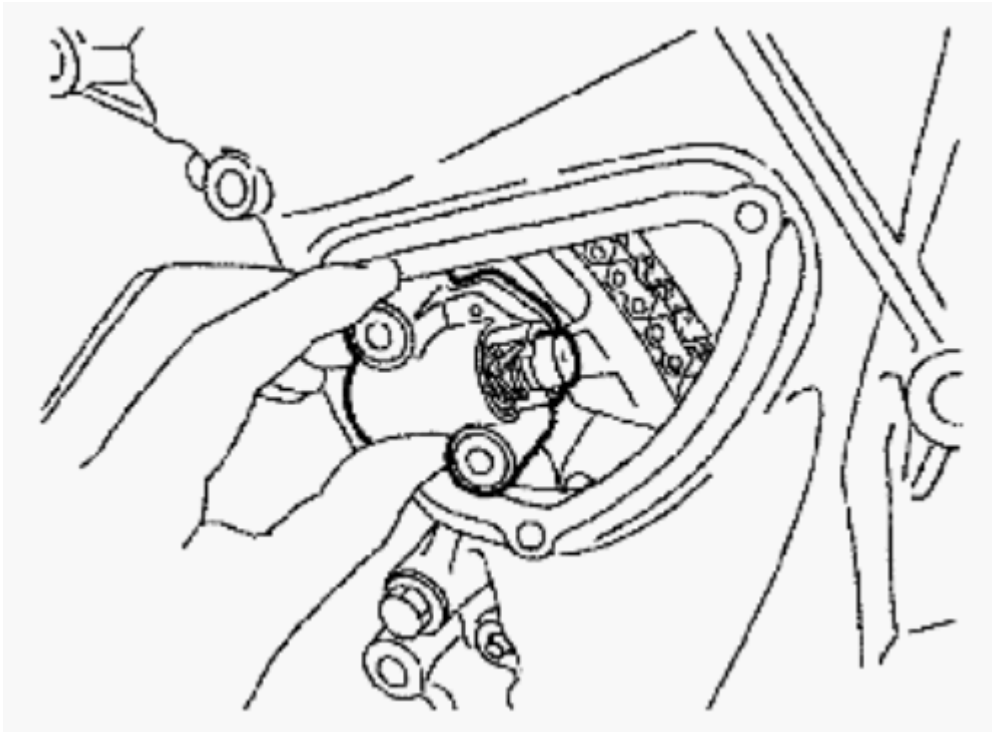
Remove Timing Chain Tensioner Bolts & Timing Chain Tensioner (Primary)
